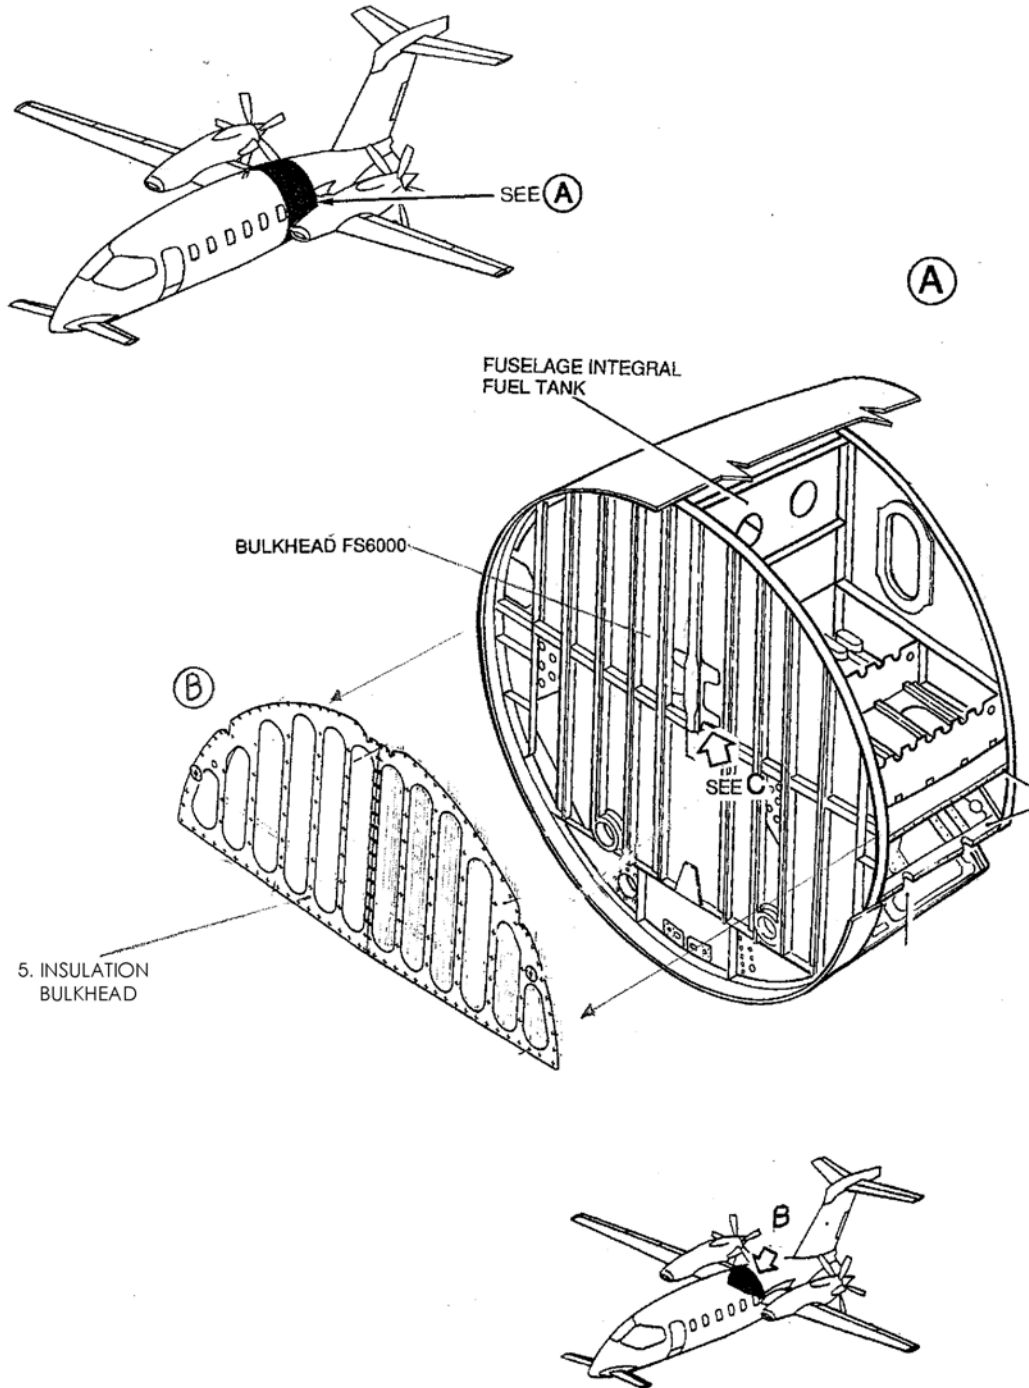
Insulation Bulkhead - Leakage Check (Sheet 1 of 3)
